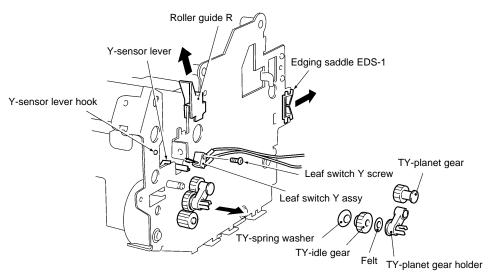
Disassembling the Right Side of the Chassis (1)
